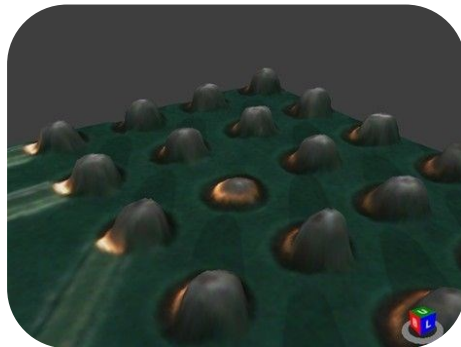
3D representation of an error in solder paste printing, solder paste poorly released from the printing stencil --> solder volume too low
